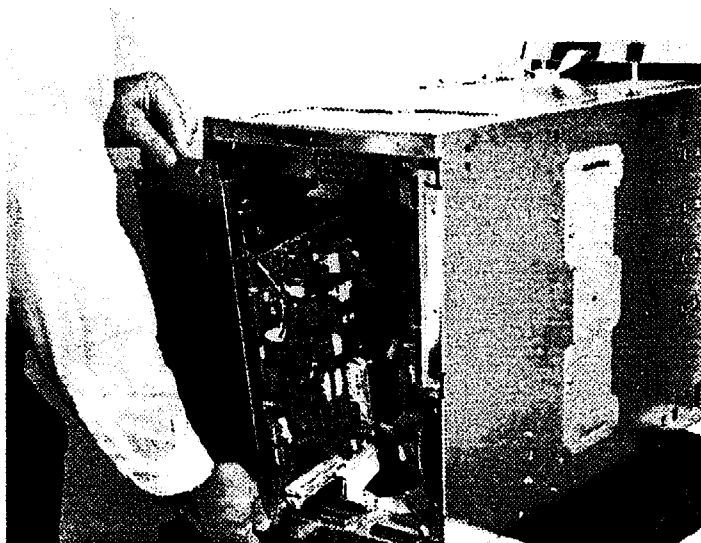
Rotating the Power Supply Module Out of the Chassis
